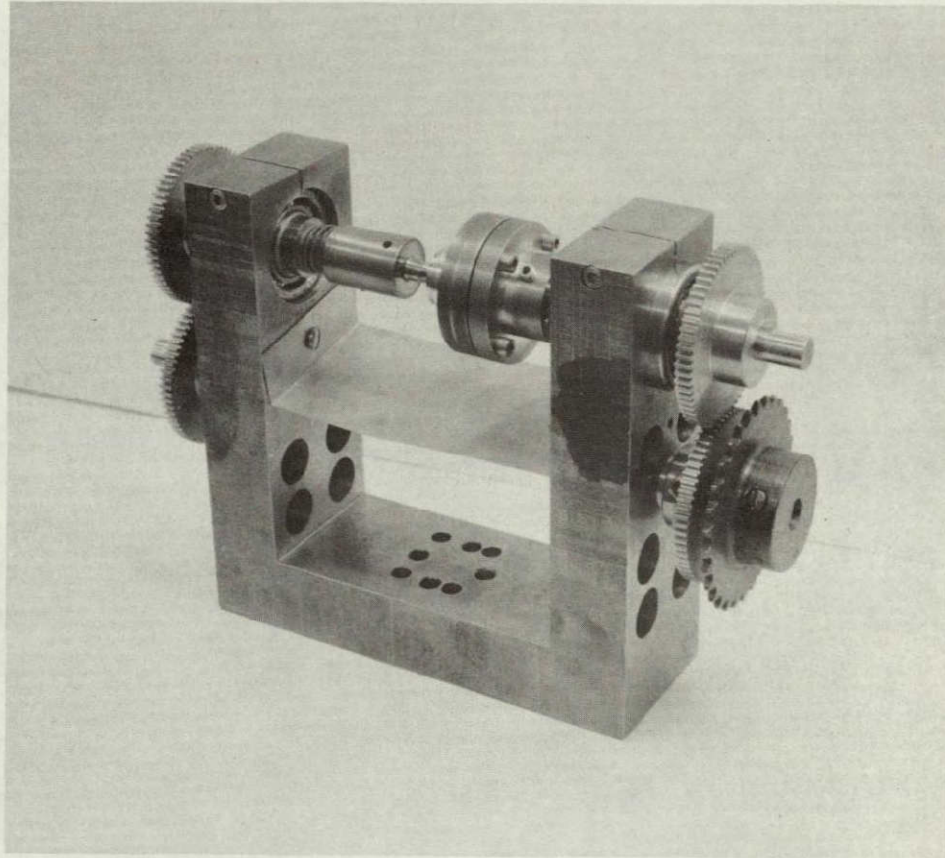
Emitter Assembly Ready for Electron Beam Weld.
